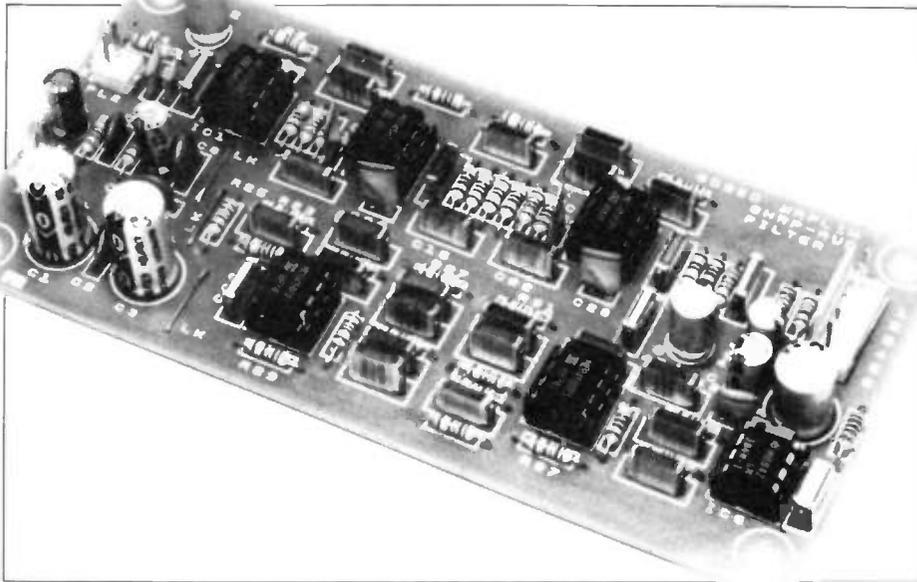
The Completed PCB. Note that all the Connector Tabs face one way.
